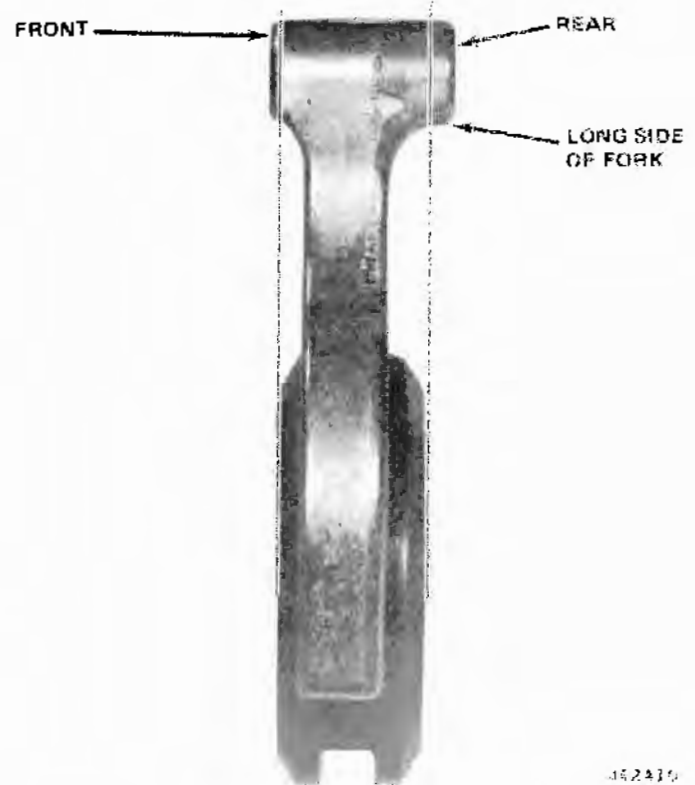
Lockup Hub Assembly with Shift Fork
